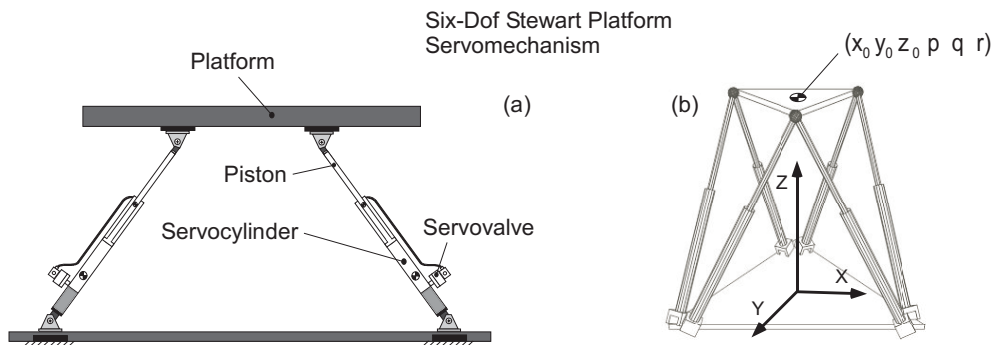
(a) Drawing two of the six servoactuators, (b) Schematic view of a six-dof Stewart Platform.
